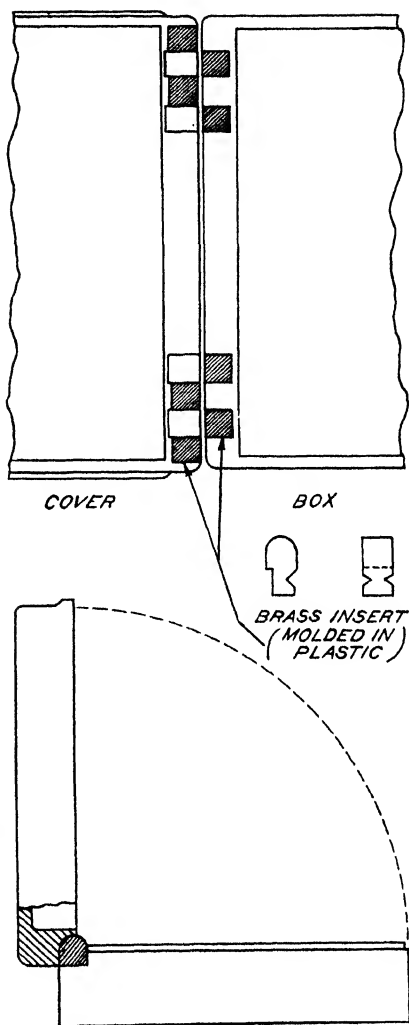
Detail of hinge that is made by inserts (one of which is shown separately) embedded into a thick section of the molding when it is made. Holes for the pin are drilled subsequently. The cover has similar inserts staggered to mate with those in the base.
